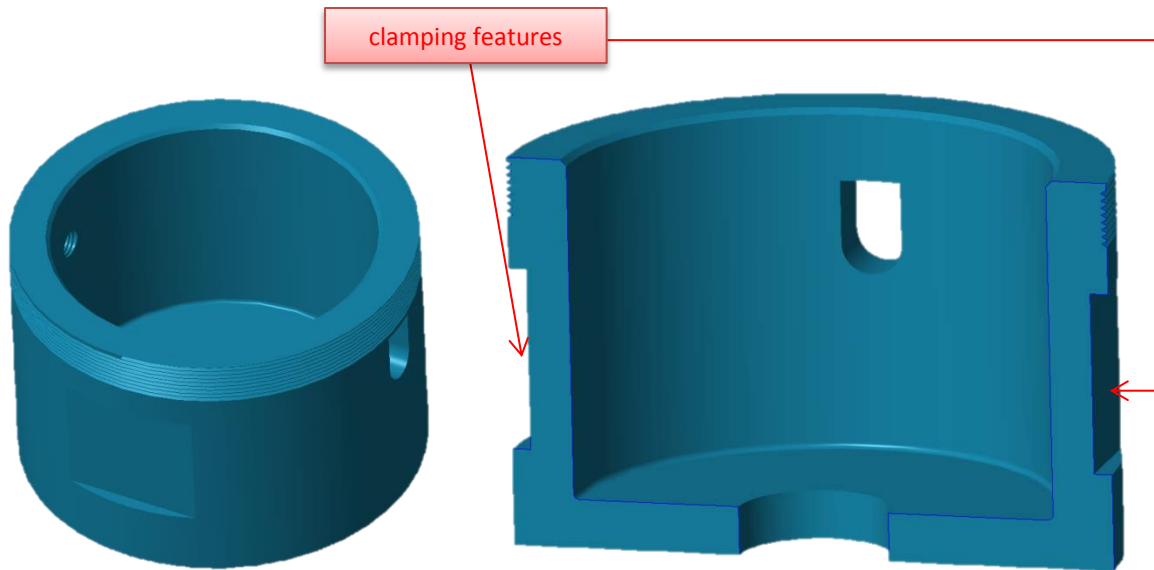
CAD model of the external bag (a) and its middle section (b).
